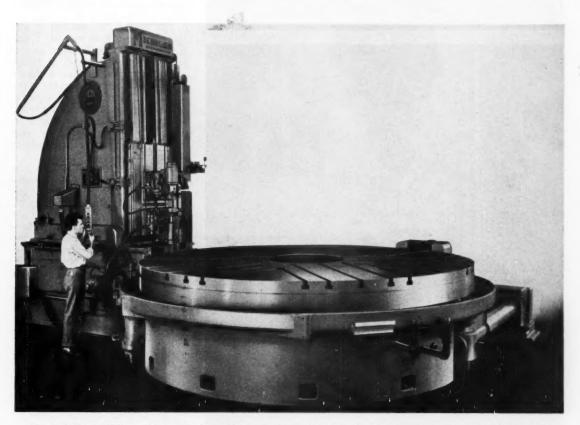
Michigan V-180 gear-shaving machine with capacity for finishing internal and external gears up to 15 feet in diameter
